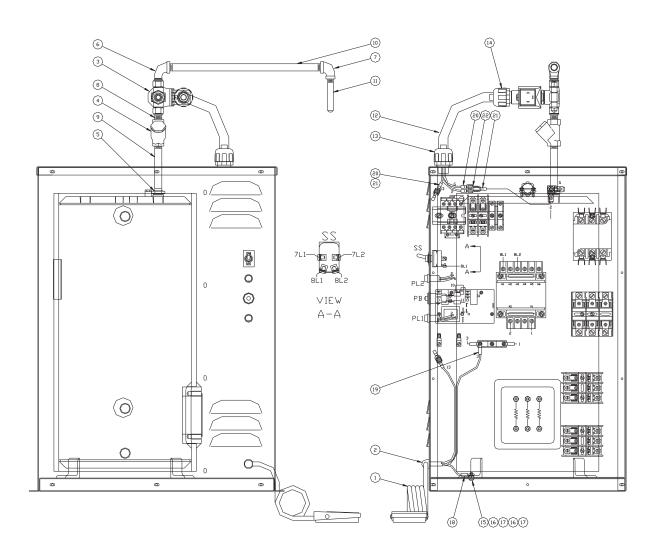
75385 (rev B) Outlet Solenoid Assembly Kit Hoffman Steam Generator
